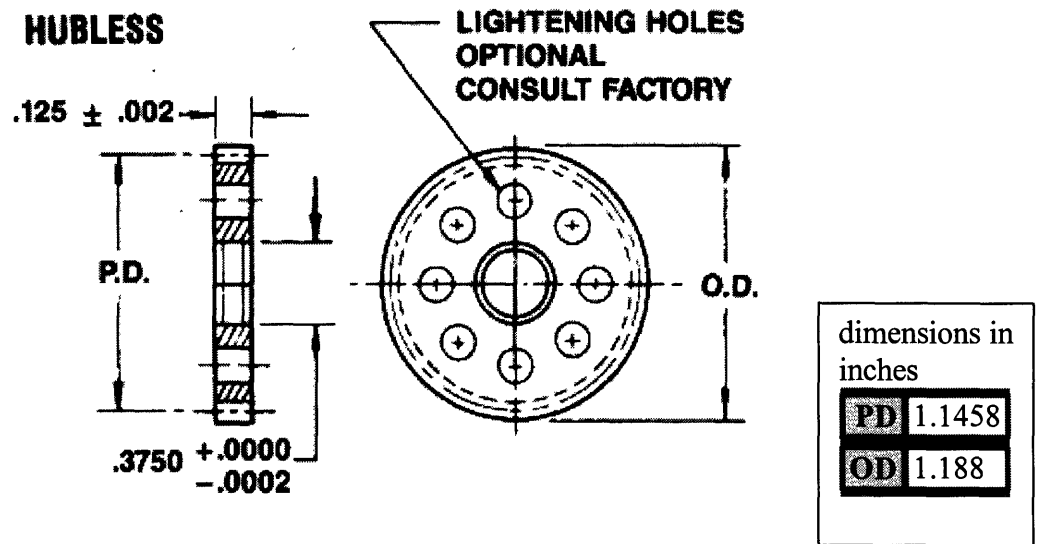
Technical Drawing of 55-teeth, hubless, spur gear with specified Pitch Diameter (PD) and Outer Diameter(OD).
